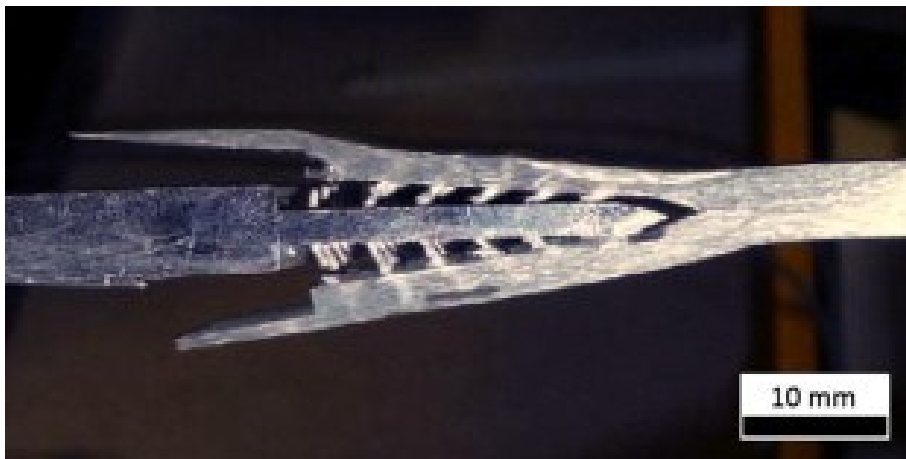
Pins obtained using Capacitor Discharge Stud Welding [26]
